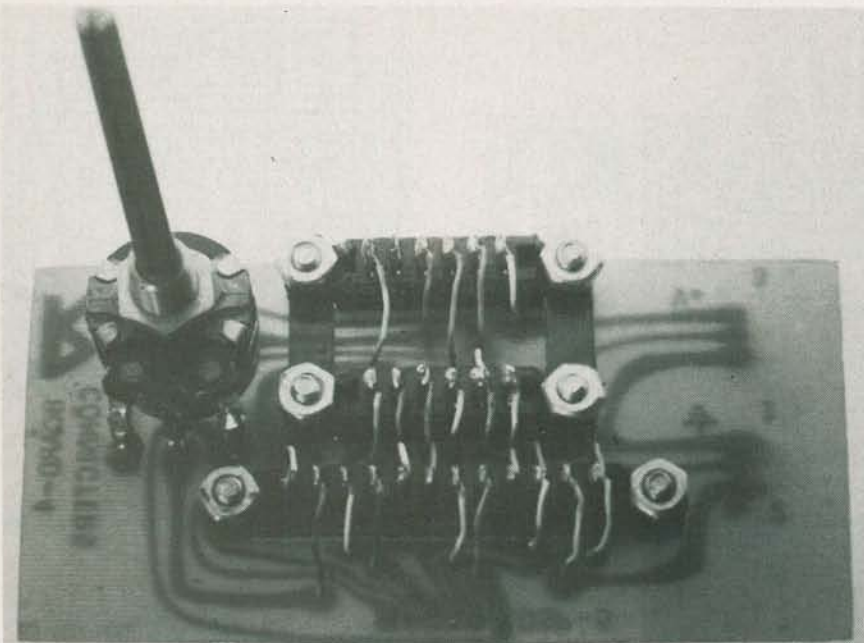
RESISTOR R48 and switch S1, a single unit, are soldered directly to board 4. That unit's mounting hardware is used to secure the board to the case.
